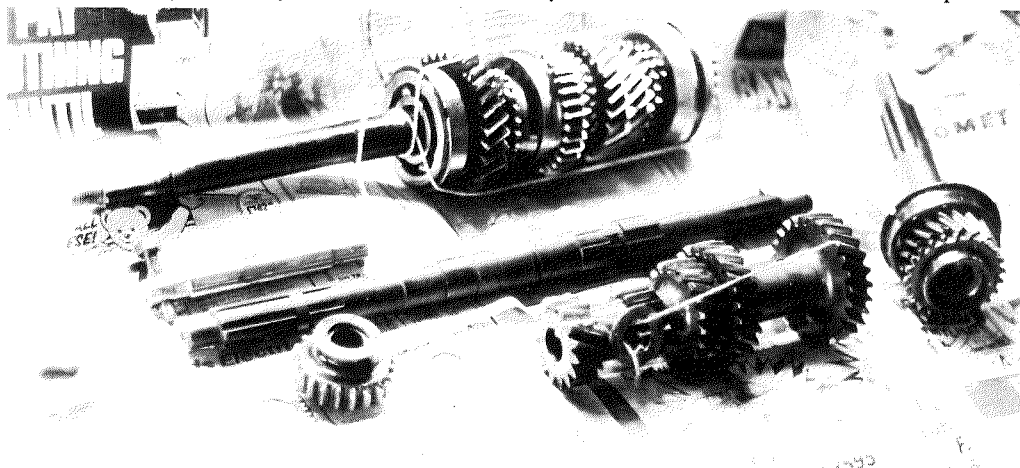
Component parts laid out on the bench ready for cleaning. A piece of string keeps them in order. Note the different overdrive mainshaft.
